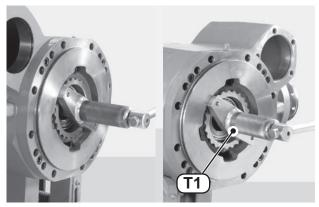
Adjusting clearance between pinion and ring gear. To INCREASE: loosen the ring nut on ring gear side and tighten the ring nut on non-ring gear side by the same measure. To DECREASE: perform the same operations inversely. To rotate ring nuts, use special wrench T1 (See drawing T1 p. 79).
